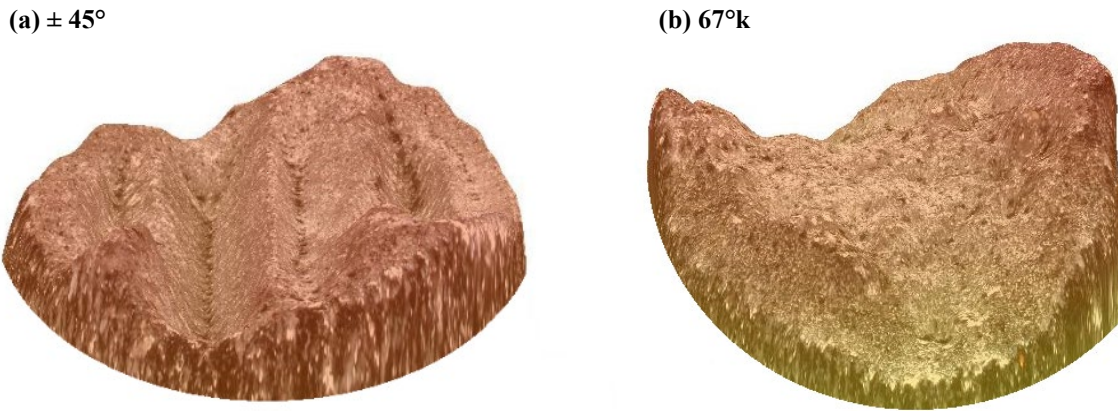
Reconstructions of the fracture surfaces via optical microscope. a) $\pm 45^\circ$ Tensile specimen. b) $67^\circ k$ Tensile specimen.
